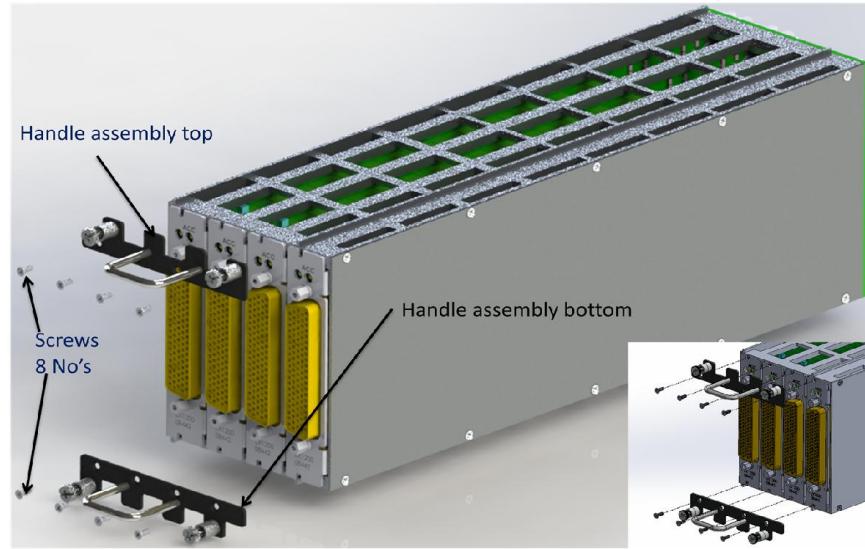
REMOVING IO CARDS FROM SMP-4 MODULE DIAGRAM
